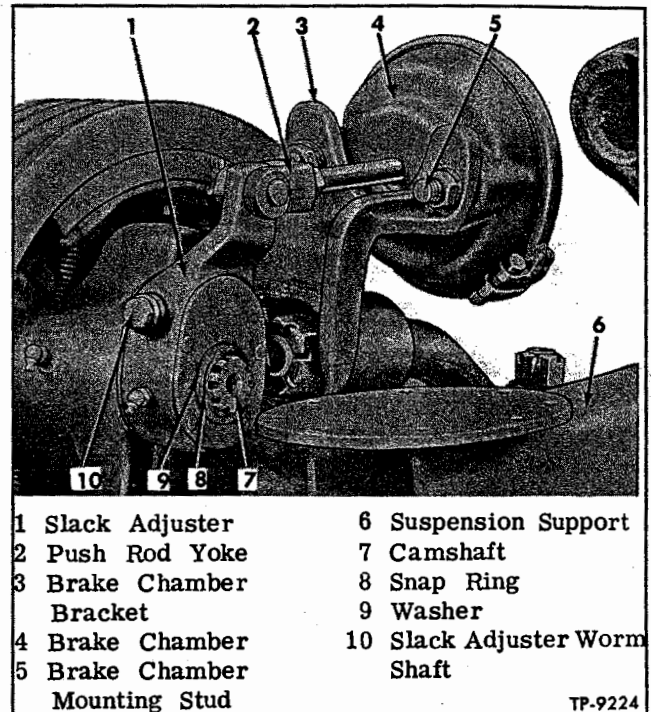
Front Brake Camshaft, Bracket, and Slack Adjuster Assembled to Axle
